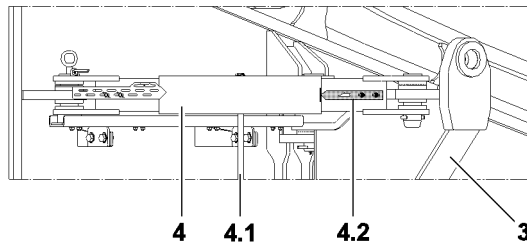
Adjustment of adjustment sleeve for lifting one of the crawler carrier halves
